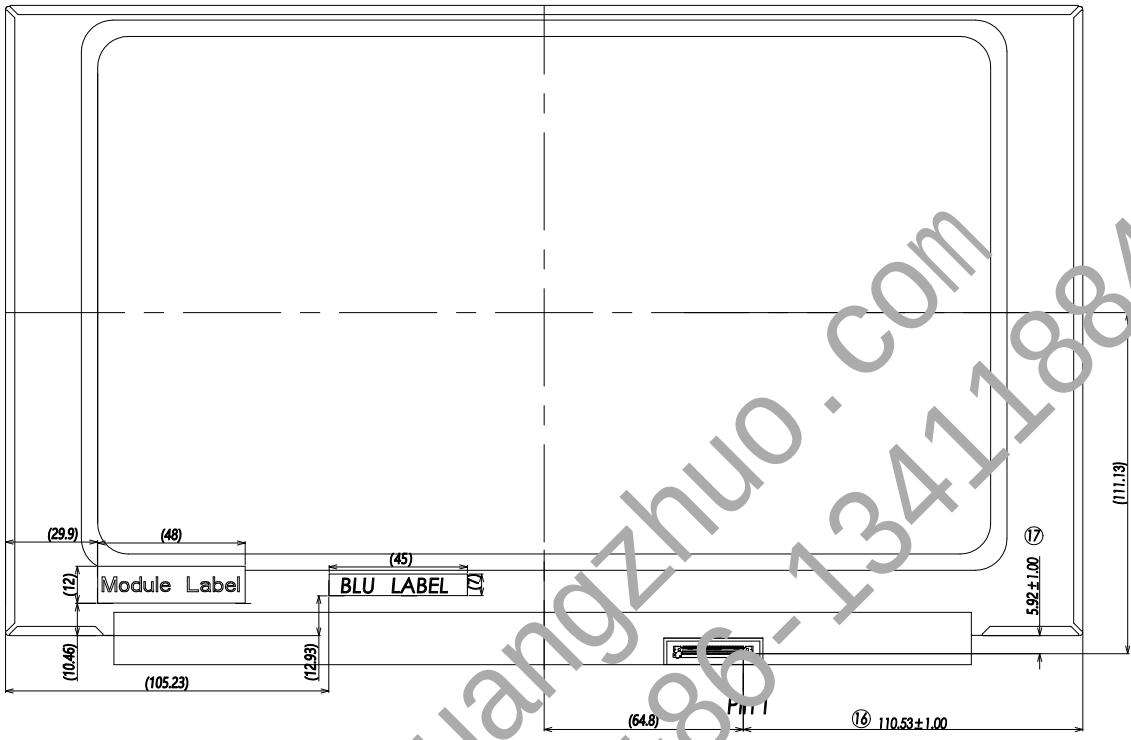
FT-LCD Module Outline Dimensions (Rear view)
